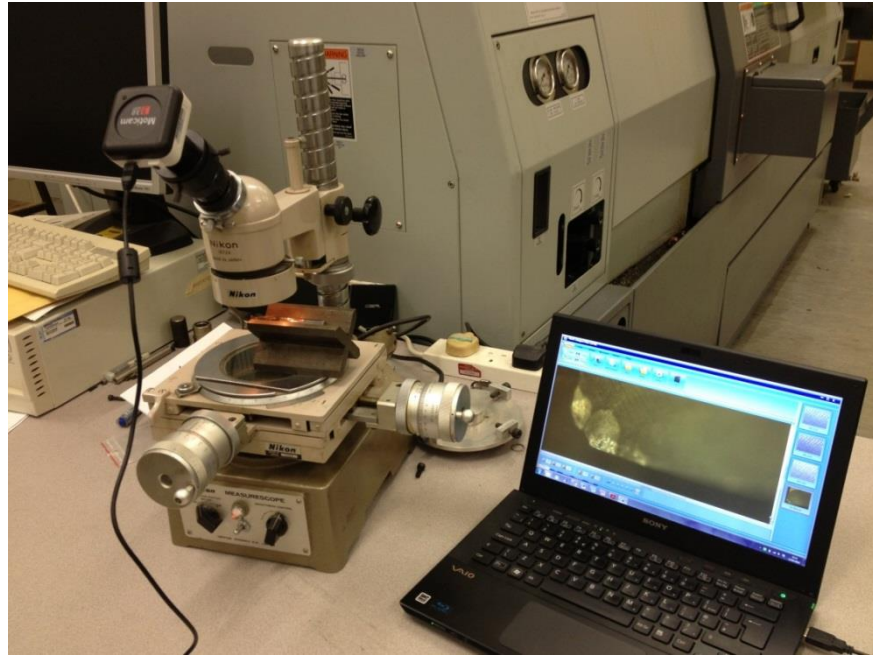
Tool makers' microscope and the setup used for tool wear measurement
